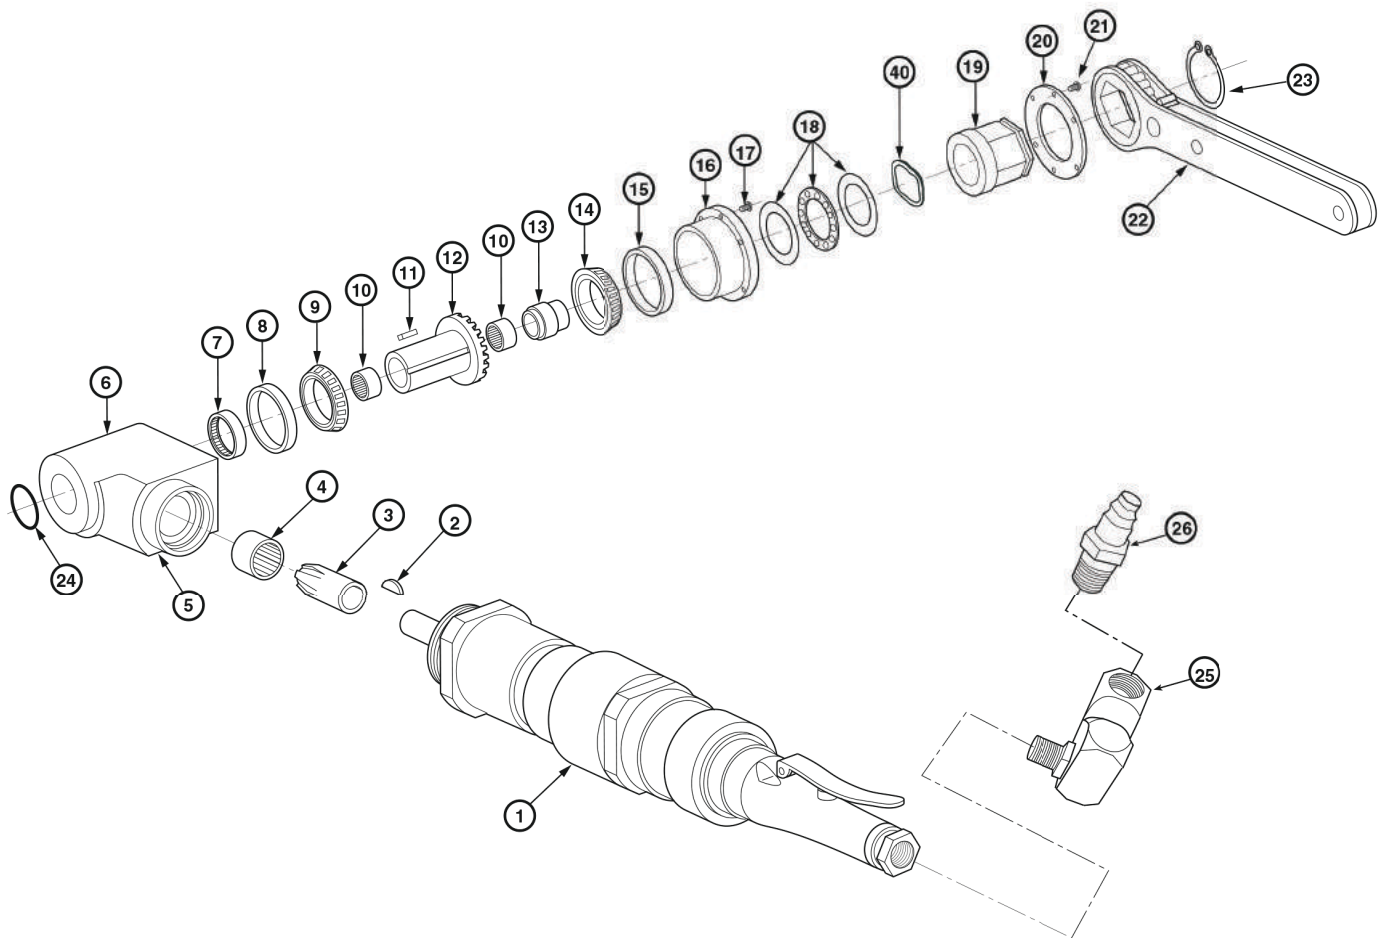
BG44 BOILER GUN - LOW VELOCITY, WRENCH FEED ASSEMBLY (P/N BG44LVWR)
